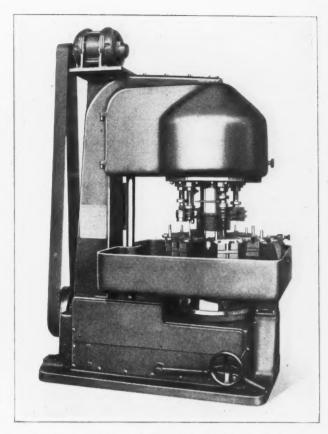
Vertical Automatic Machine developed by the Cincinnati Engineering Tool Co.
